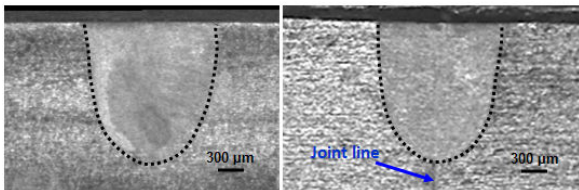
Comparison of weld bead geometry for bead-on plate welding and butt welding
